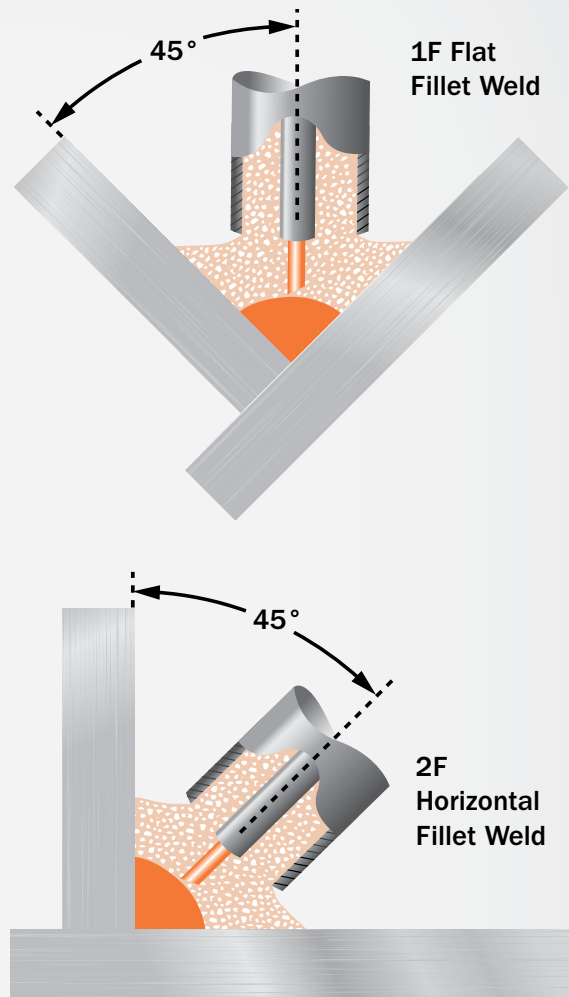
Torch placement for SAW fillet welds on T-joints.
